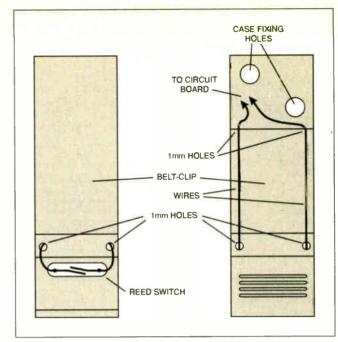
One suggested method of mounting and wiring the magnet-operated reed switch on the case belt-clip.
